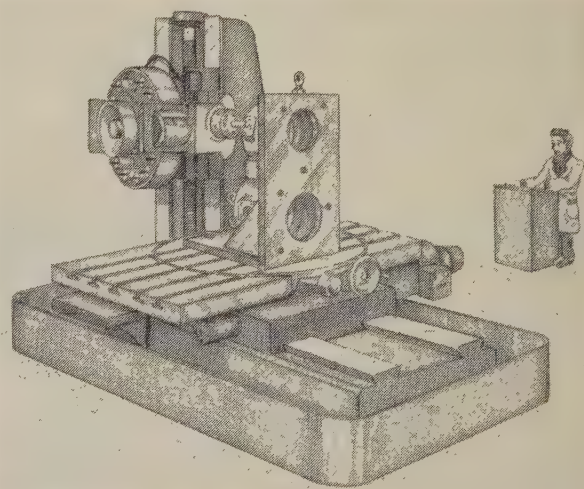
Numerically controlled milling-drilling-boring machine of the seventies with built-in rotary table and capacious tool storage drum.
